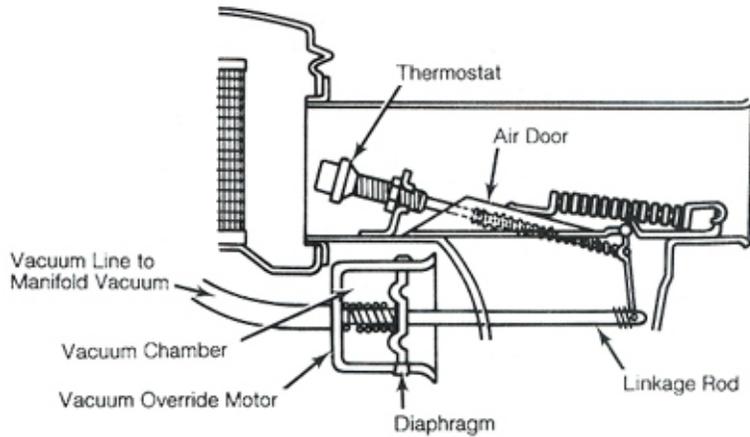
Thermostat Controlled :Air Door with Vacuum Override Motor
